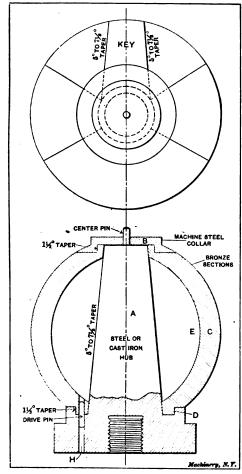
Elevation and Plan showing Construction of Sectional Chuck
